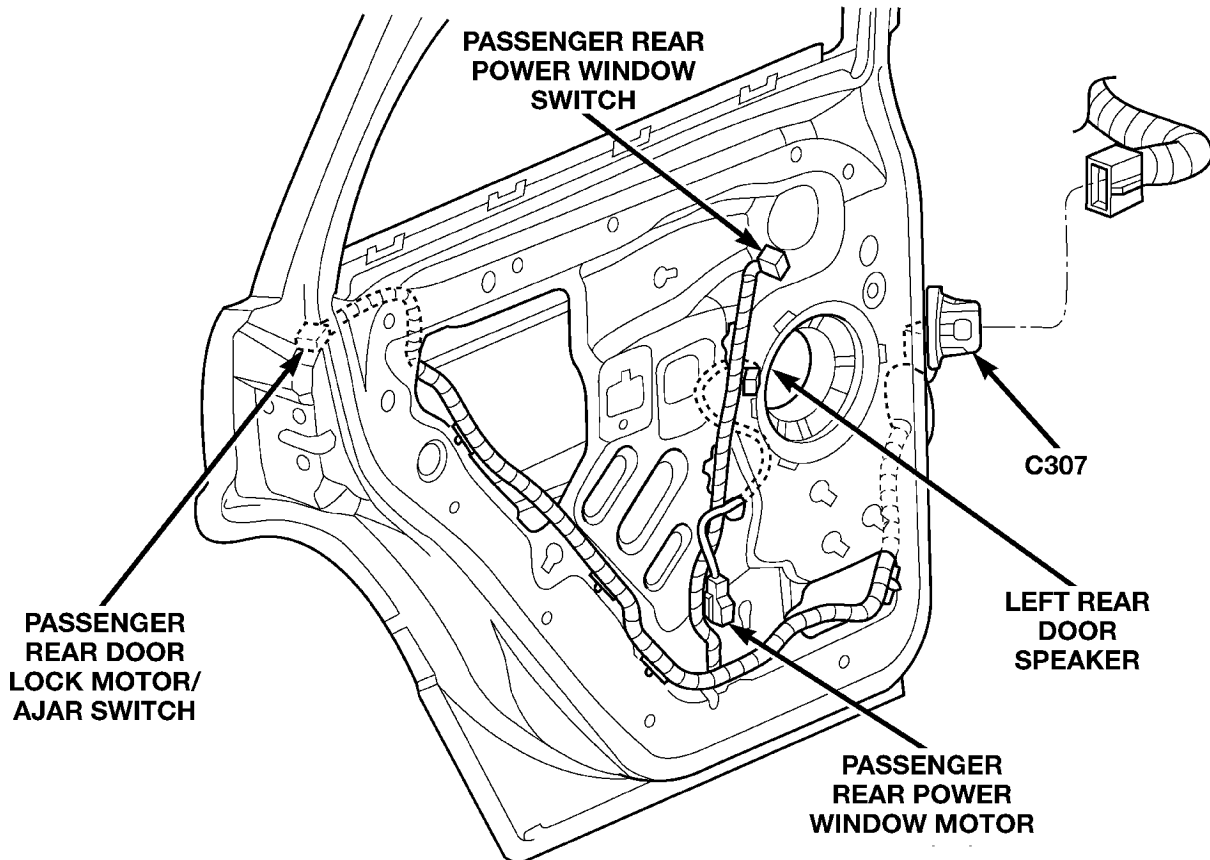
Door Connections (Rear Door, Passenger Side) — RHD
